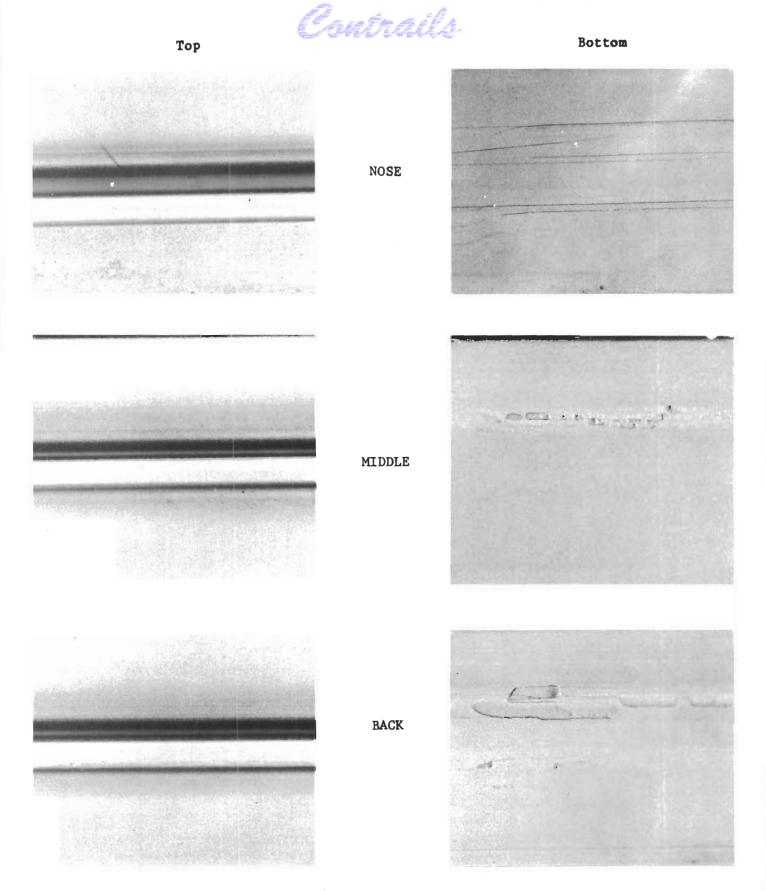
As-Extruded Surface of Full-Length Pressed and Sintered
